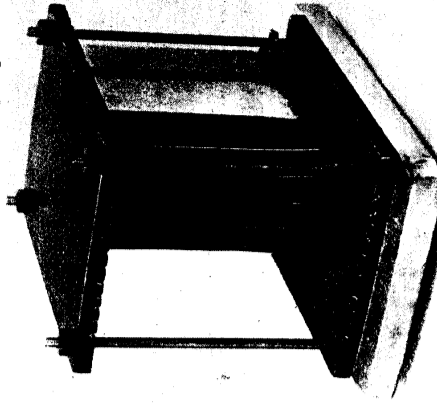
Fixed plates set up and top and bottom panels bolted down
